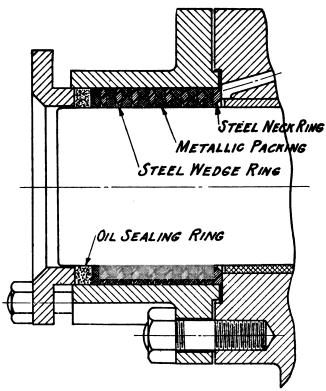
Crankshaft stuffing box of York Manufacturing Co. vertical, single-acting, CO2 compressor.
